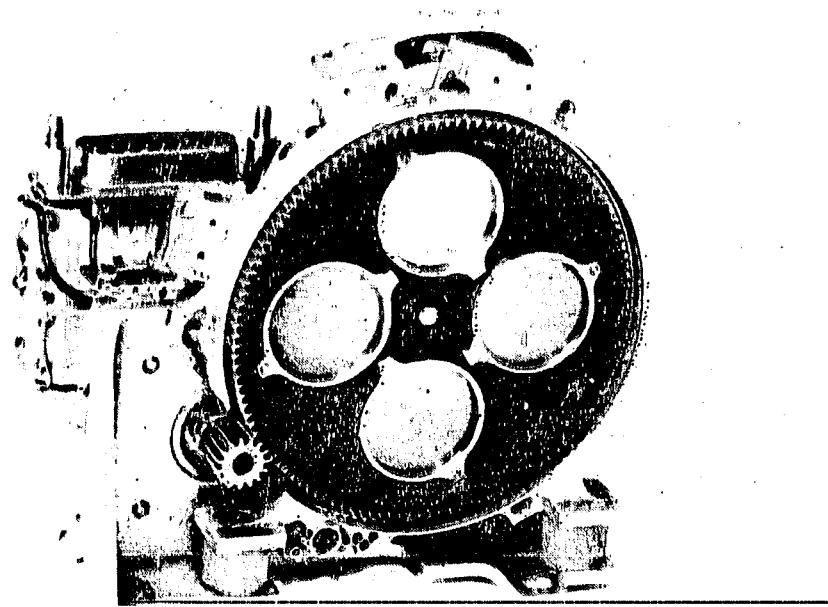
Filter wheel assembly for S.C.R. (eng. model with cover removed).
